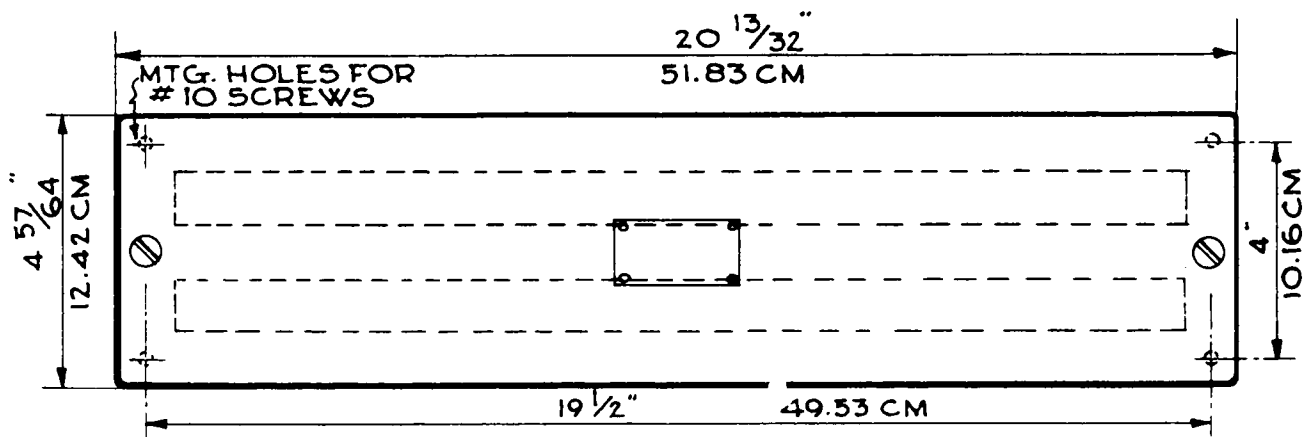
LOOP DEHYDRATOR UNIT, OUTLINE & MTG. DIMENSIONS
